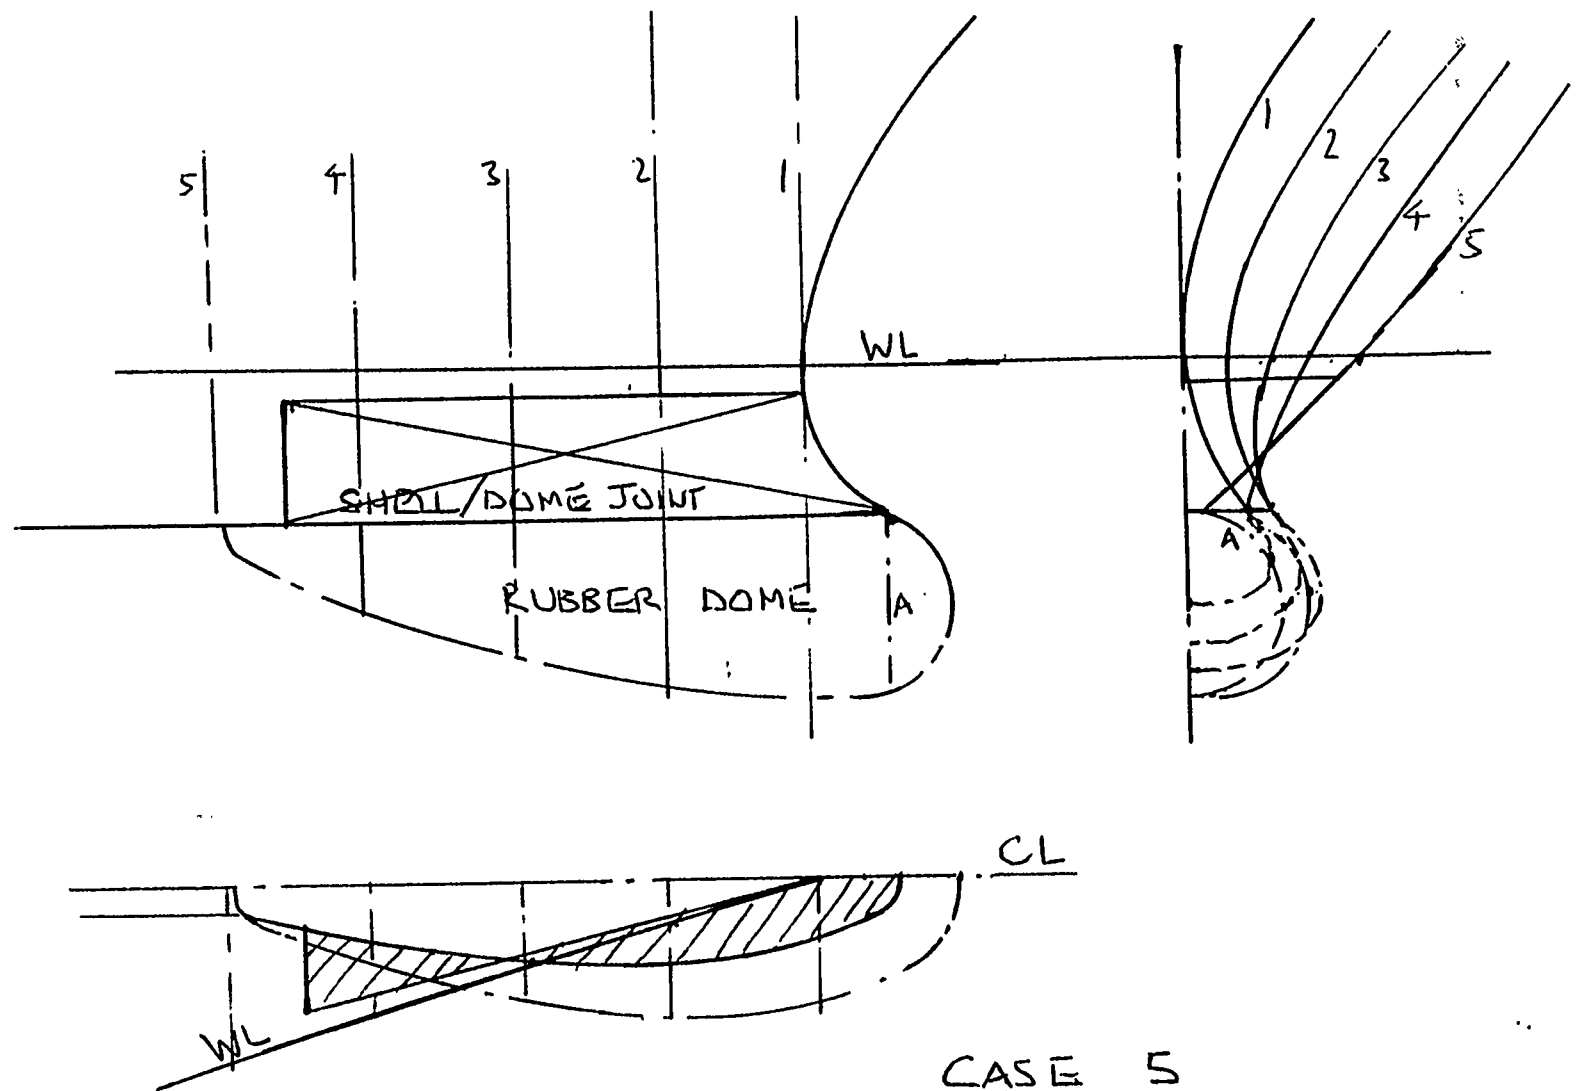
SHELL PLATE TEST CASE 5
